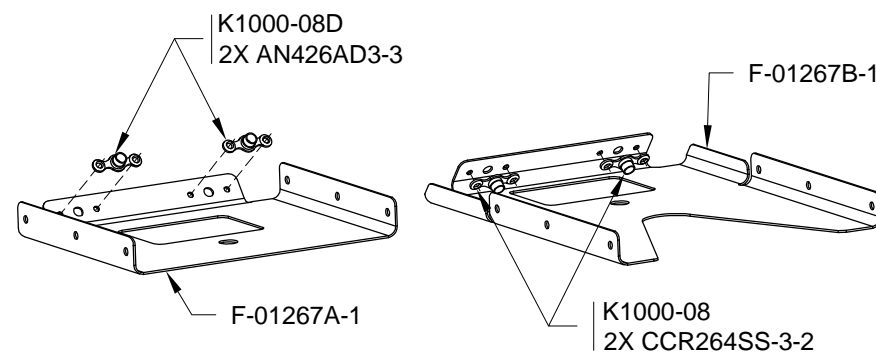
ATTACHING NUTPLATES TO F-01267A-1 & F-01267B-1
